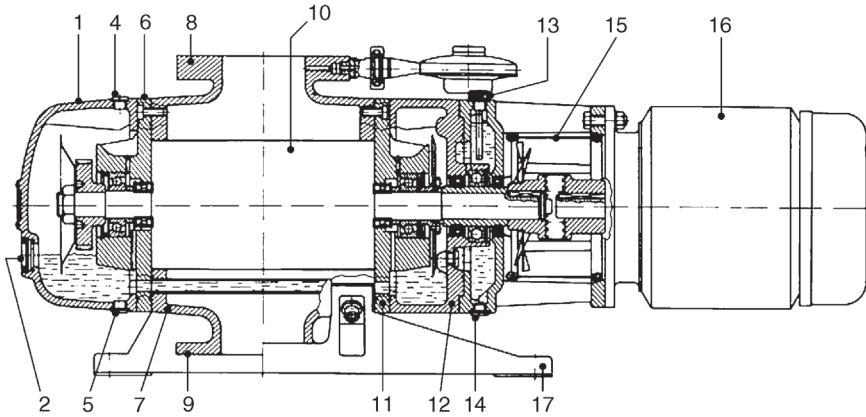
Longitudinal section of a Roots pump. 1: front cover; 2: oil-level glass; 4: oil filling screw; 5: oil drain plug; 6: bearing flange on the impeller side; 7: pump housing; 8: inlet flange; 9: outlet flange (connects to roughing pump); 10: driven impeller; 11: bearing flange on the motor side; 12: intermediate flange; 13: oil filling screw with oil dip stick (shaft lead through); 14: oil drain plug (shaft lead through); 15: lantern with protecting cage; 16: driving motor; 17: foot. Horizontal shading: oil.
